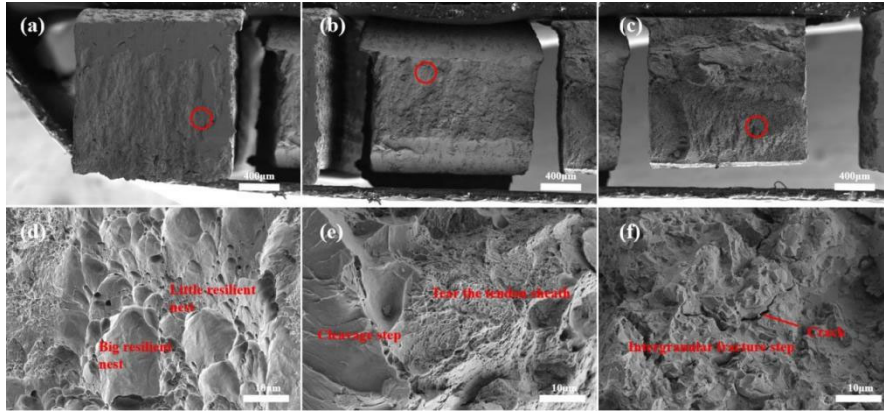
Macroscopic and microscopic fracture surfaces of Al0Ti15: (a) base metal; (b) heat-affected zone; (c) cladding layer; (d) magnified view of the area circled in white in (a); (e) magnified view of the area circled in white in (b); (f) magnified view of the area circled in white in (c)
